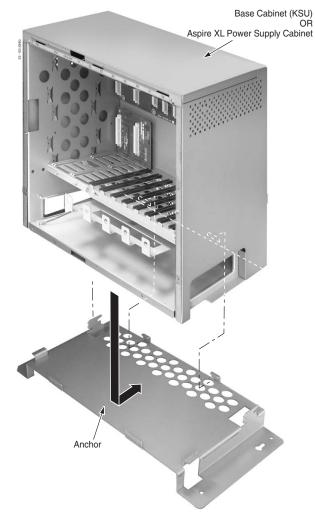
ATTACHING THE CABINET TO THE MOUNTING BRACKET
